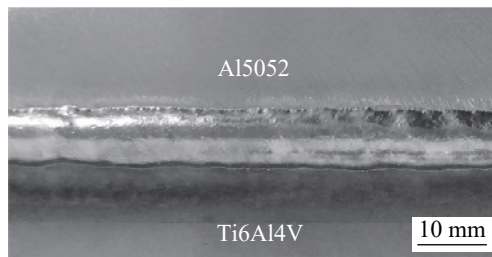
Typical appearance of Al5052/Ti6Al4V welded-brazed joints
